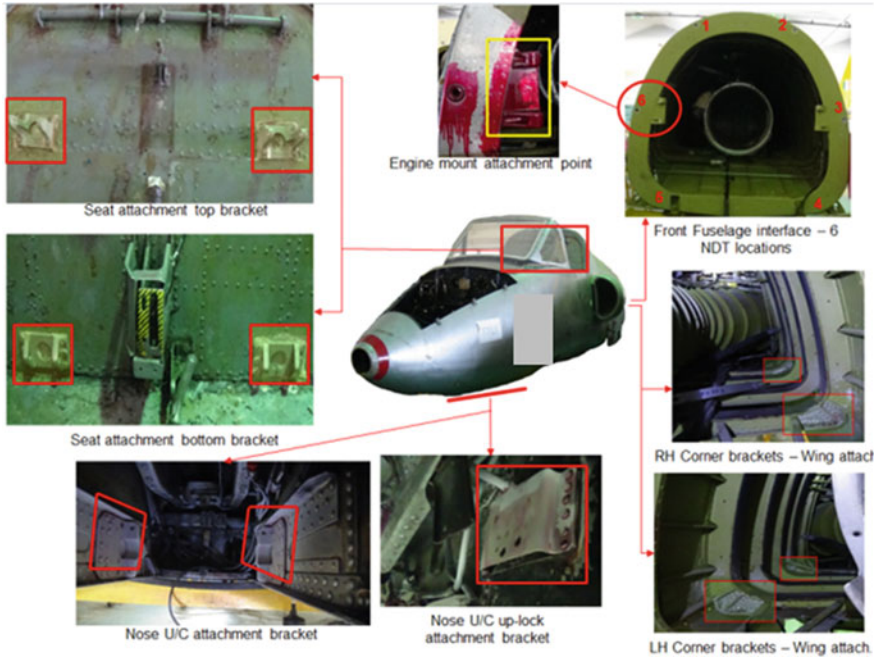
CD check areas of front fuselage and nose landing gear brackets
